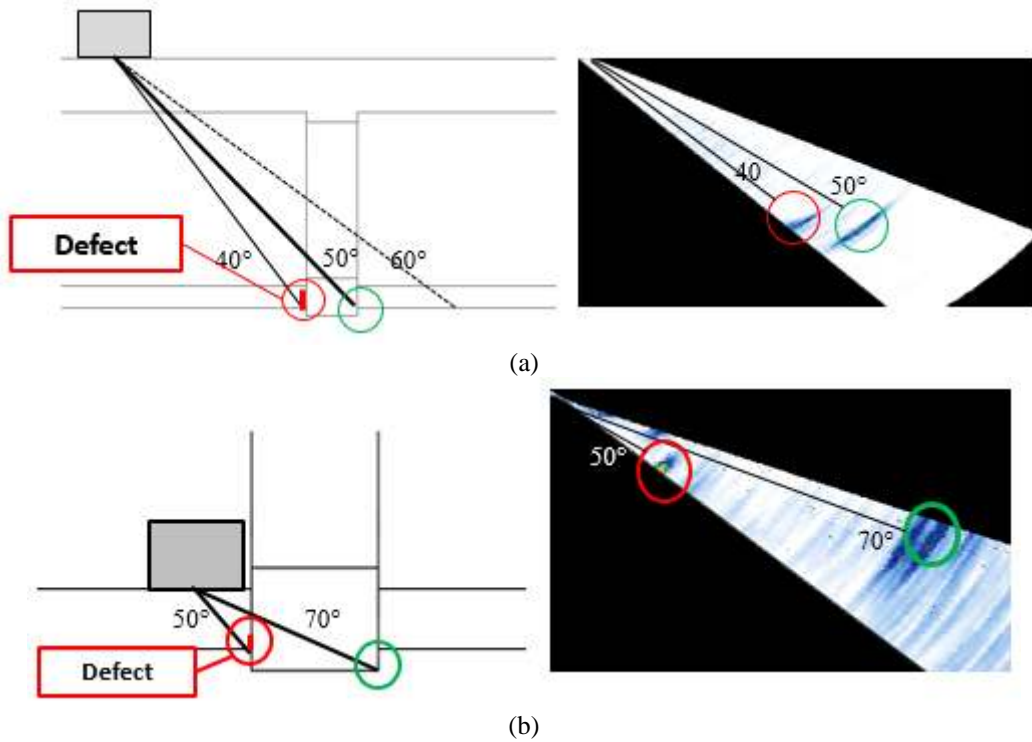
Examples of S-Scans from welded rails: a) from rolling surface; b) from foot upper surface.
